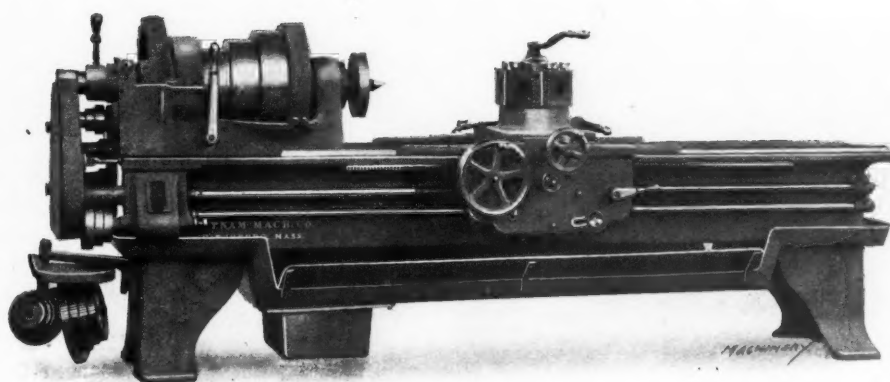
Putnam 22-inch Lathe with Heavy Turret on Special Carriage
